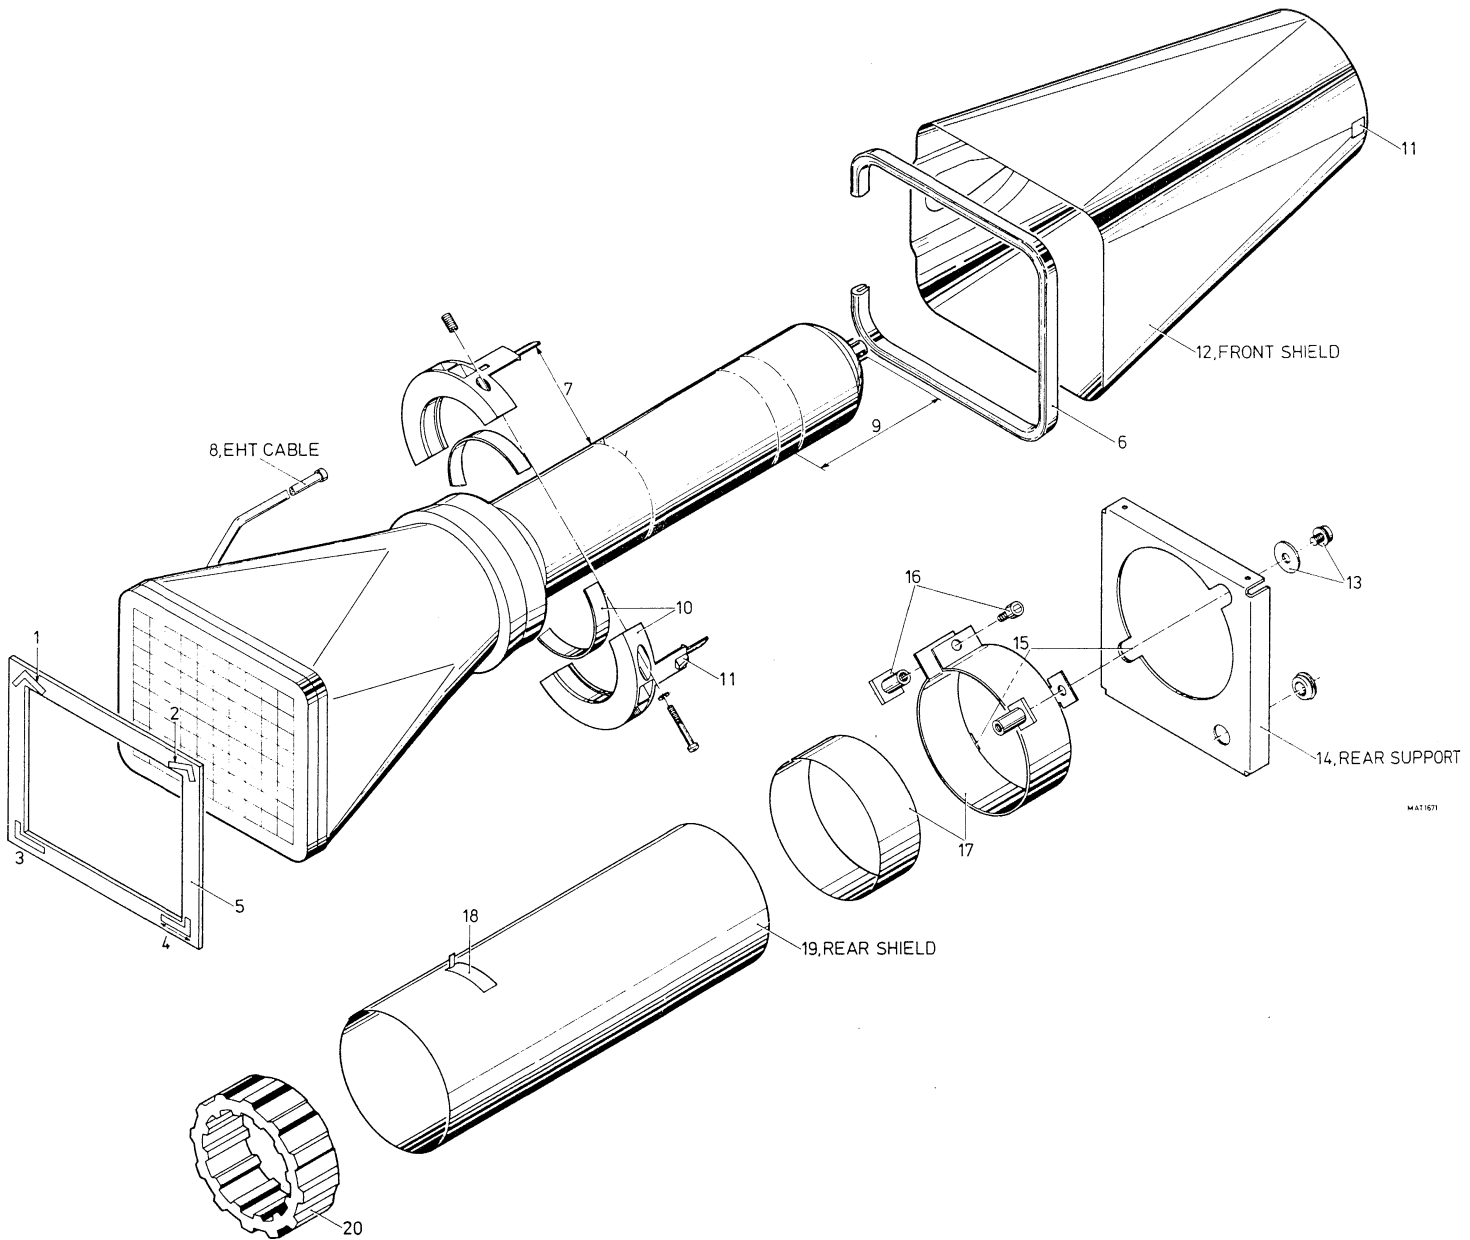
Exploded view of CRT and belonging mechanical parts
